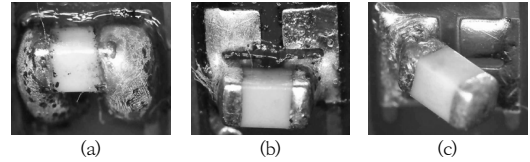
(a)Excessive Soldering (b)Insufficient Soldering (c) Excited Soldering
